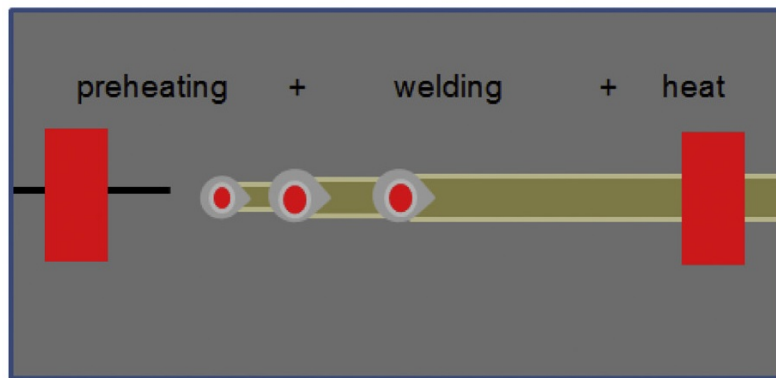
Schematic representation of electron beam welding with local preheating and post weld heat treatment [22].
